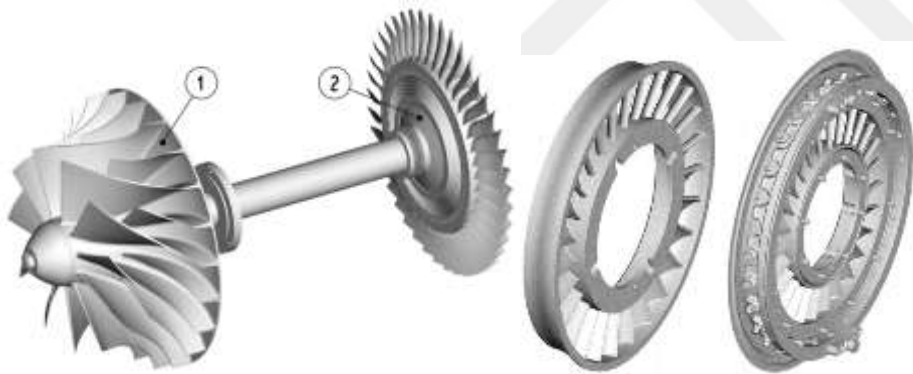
a) Compressor wheel and Turbine rotor (left) b) Fixed nozzle ring c) adjustable nozzle ring, variable area turbine (VTA)(right) (MAN Diesel and Turbo, 2013d).
